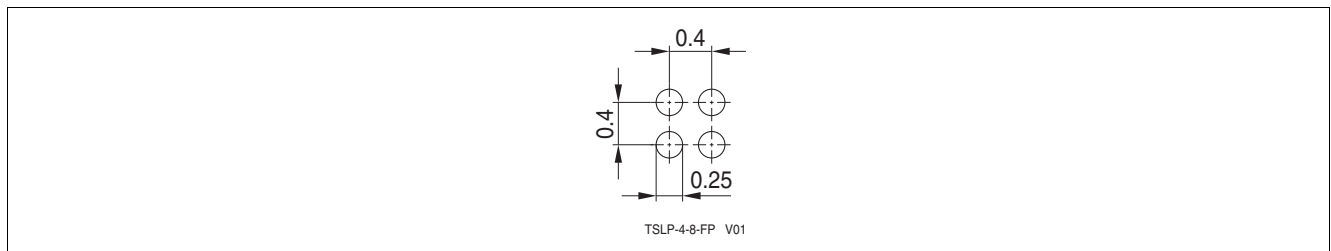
Package footprint for TSLP-4-8 (dimension in mm)
